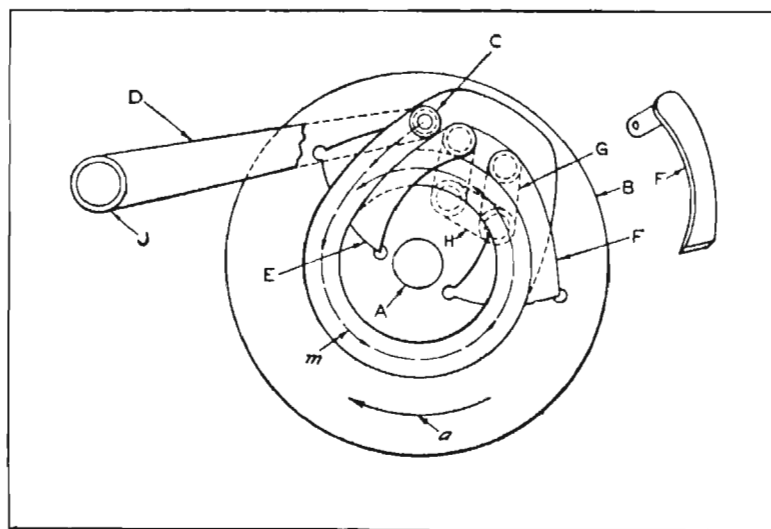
Cam Mechanism with Levers E and F Set to Guide Roller C into Concentric Groove.
